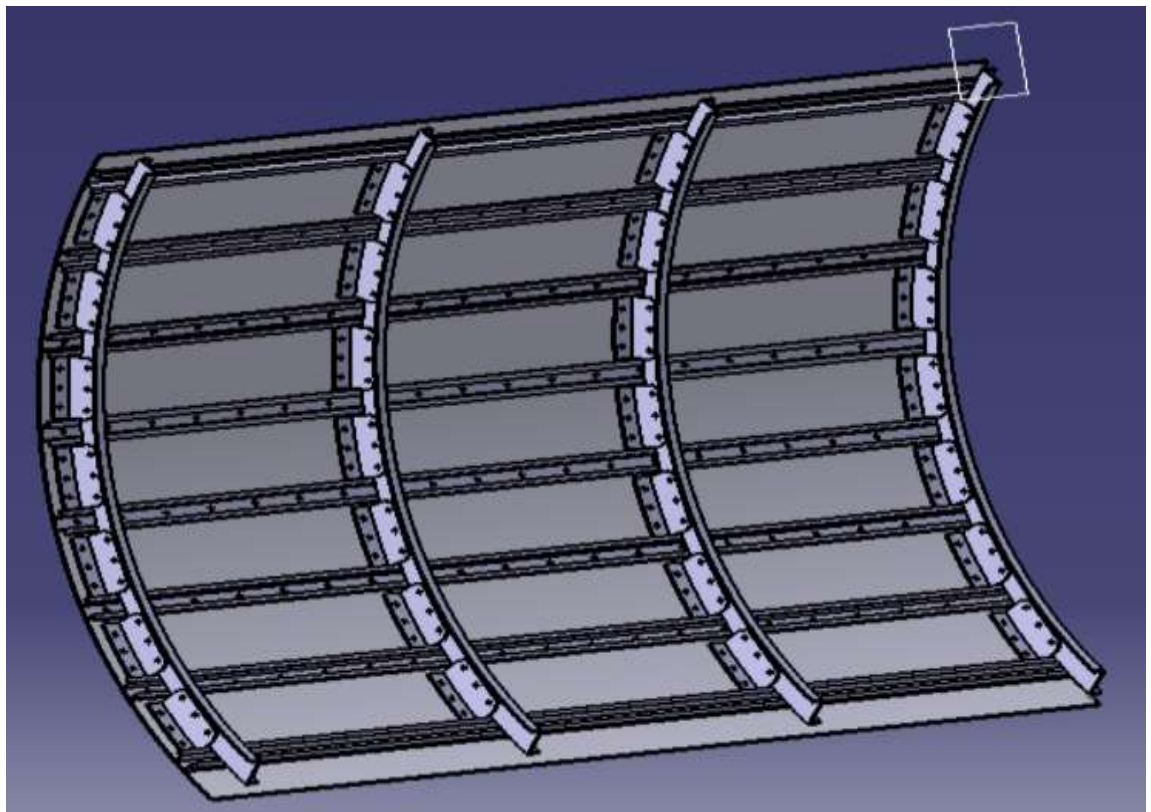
15 Assemble the case with Stringer and Shear Clip
